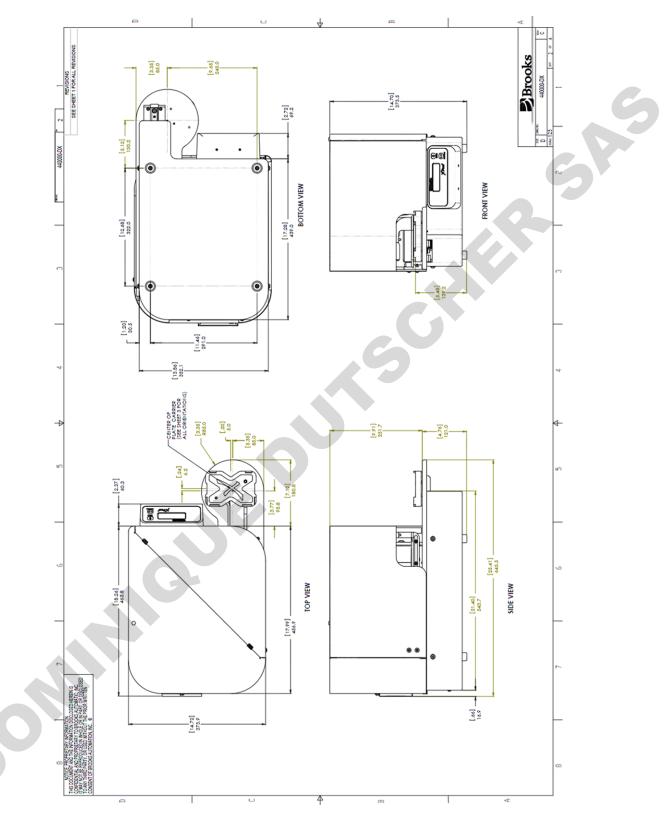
Automated Plate Seal Remover Unit Dimensions
